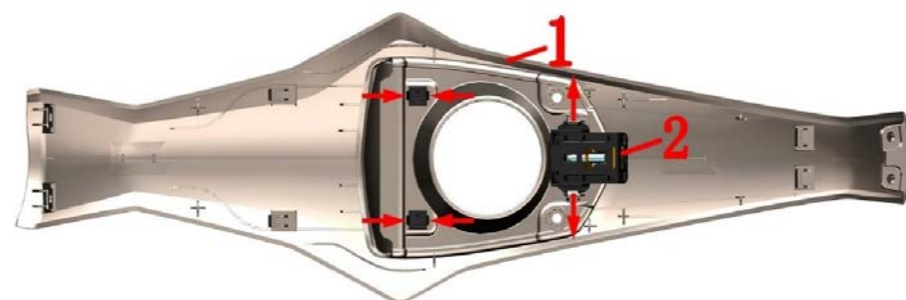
Fuel Tank Assembly		Fuel Tank Lock, Fuel Tank Outer Cover		CHK ADJ	CAUTION
